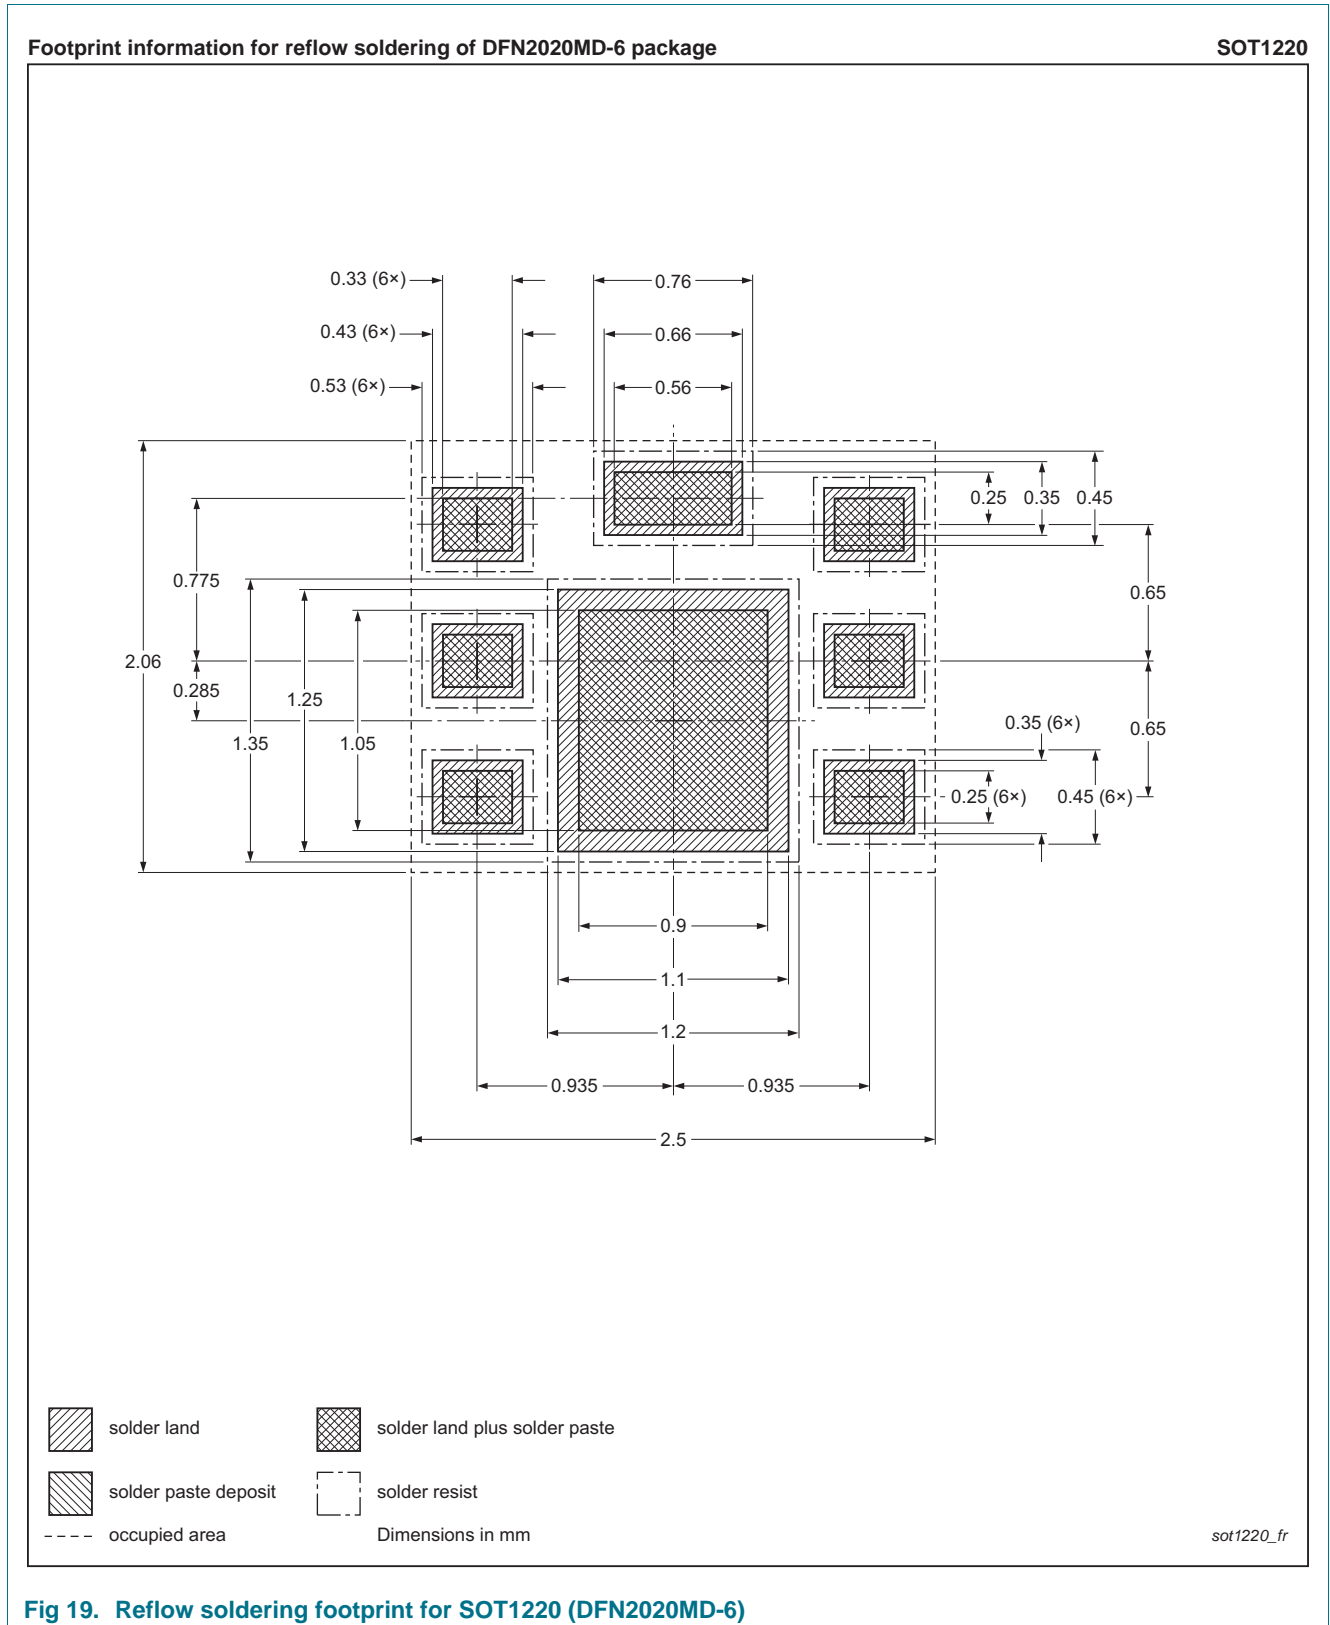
Reflow soldering footprint for SOT1220 (DFN2020MD-6)
